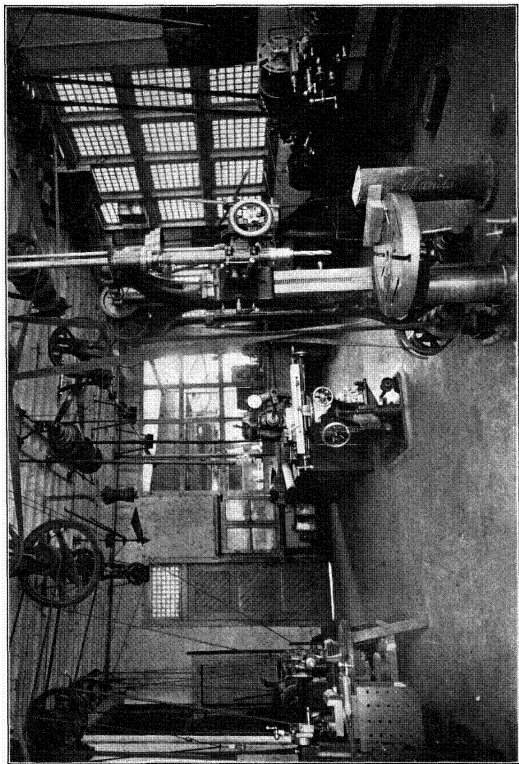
PLATE LIV. MACHINE SHOP, SHOWING SHAPER, UNIVERSAL MILLING MACHINE, PRESS DRILL, LATHE, ETC.
